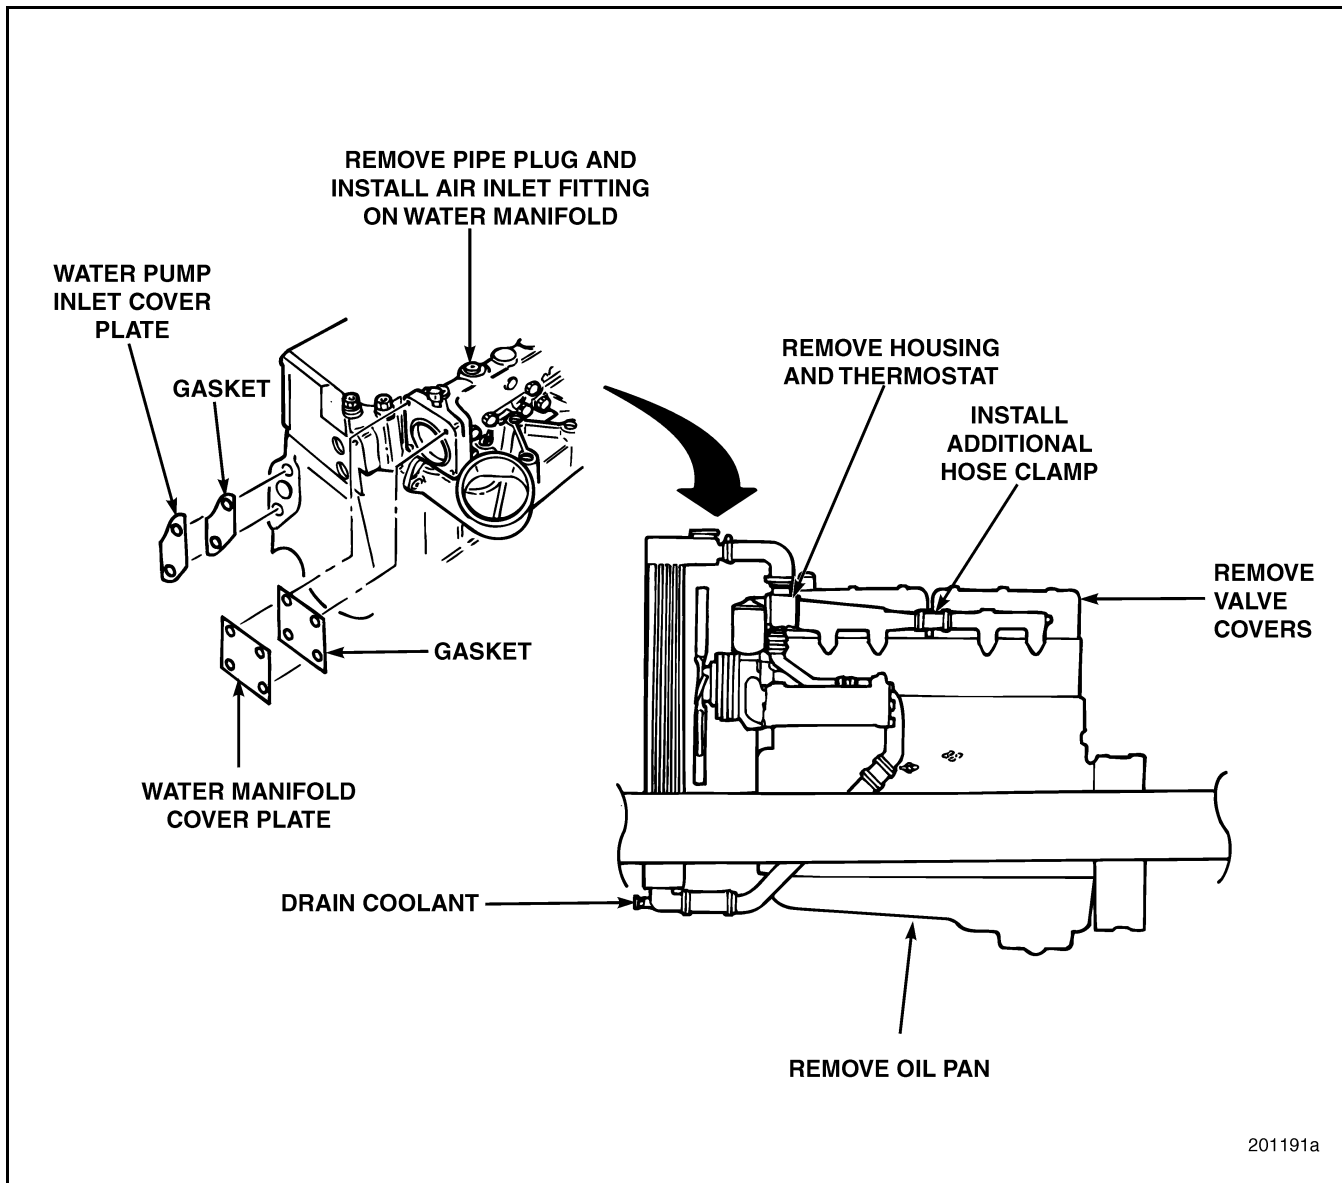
Cylinder Block/Cylinder Head Leak Check (In Chassis)
